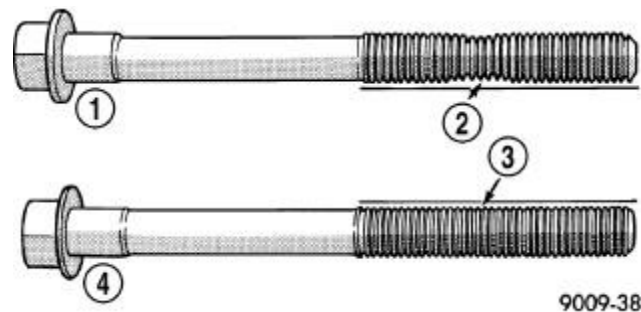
Checking Cylinder Head Bolts For Stretching (Necking)
